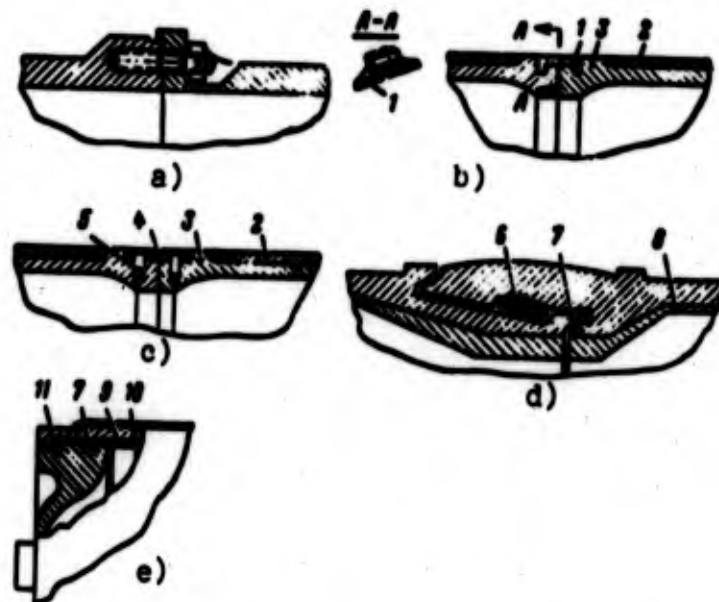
Types of connections of subassemblies of RDTT chambers: a) bolt; b) connection by collar; c) on radial pins; d) with a locking rod; e) rolled in; 1 - collar; 2 - glass laminate bodies; 3 - flanges; 4 - ring; 5 - radial pins; 6 - locking rod; 7 - sealing ring; 8 - heat shielding coating; 9 - thrust collar; 10 - case of the combustion chamber; 11 - face.
